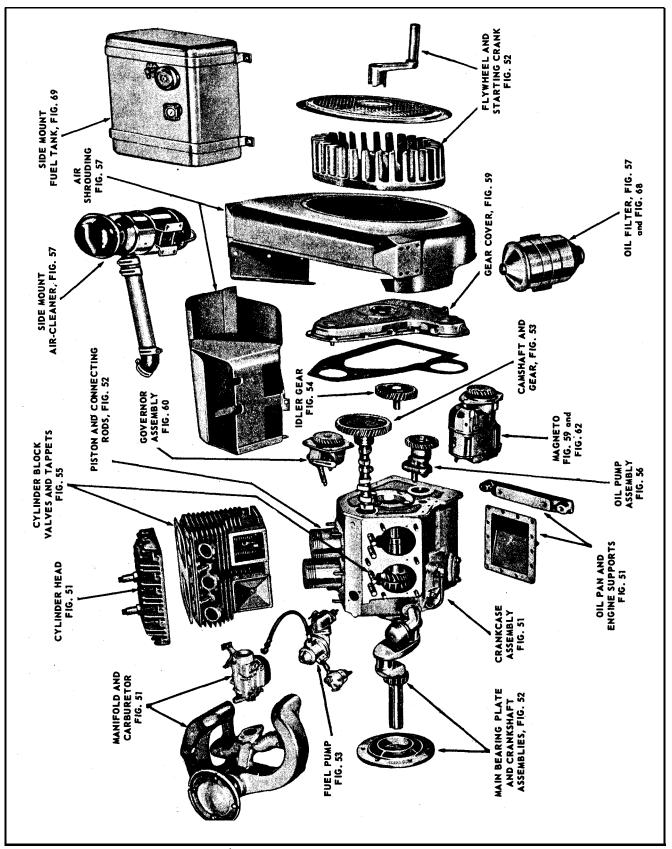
, EXPLODED VIEW OF ENGINE Refer to figure numbers for break down of parts.
